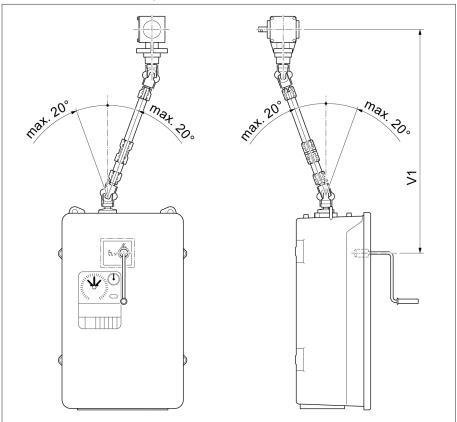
Drive shaft with cardan joints, with insulator (= special model)
